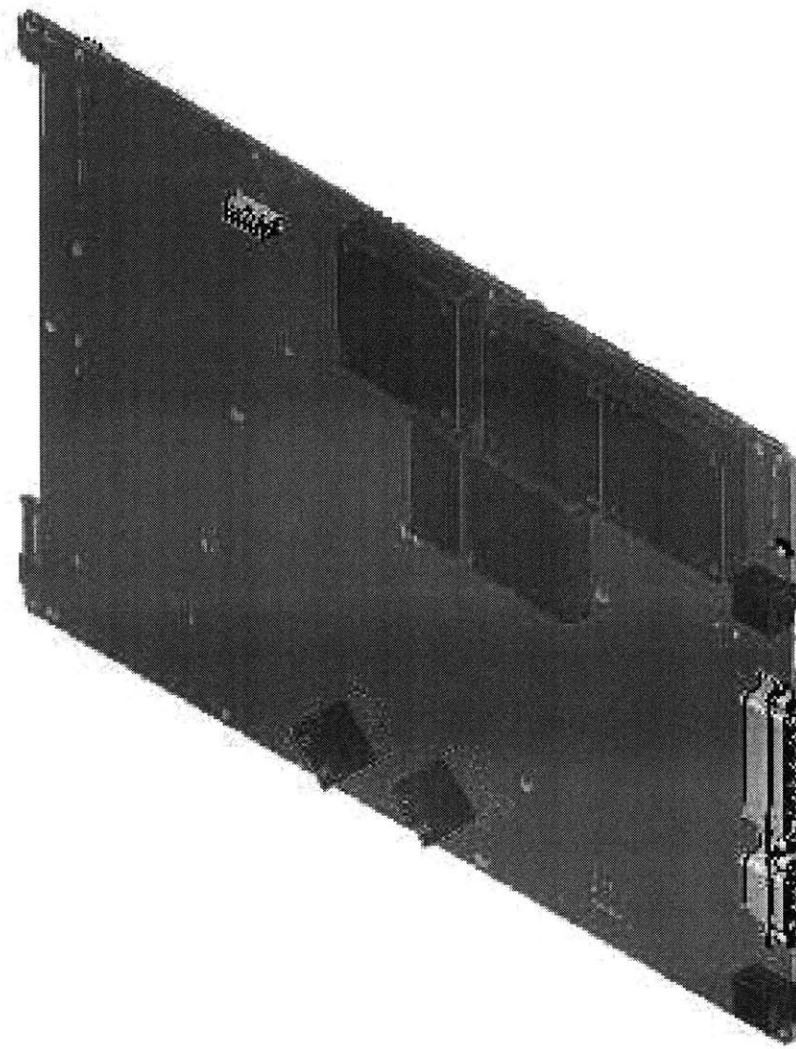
DTRx Printed Circuit Card Assembly (FR-4) Physical Realization
